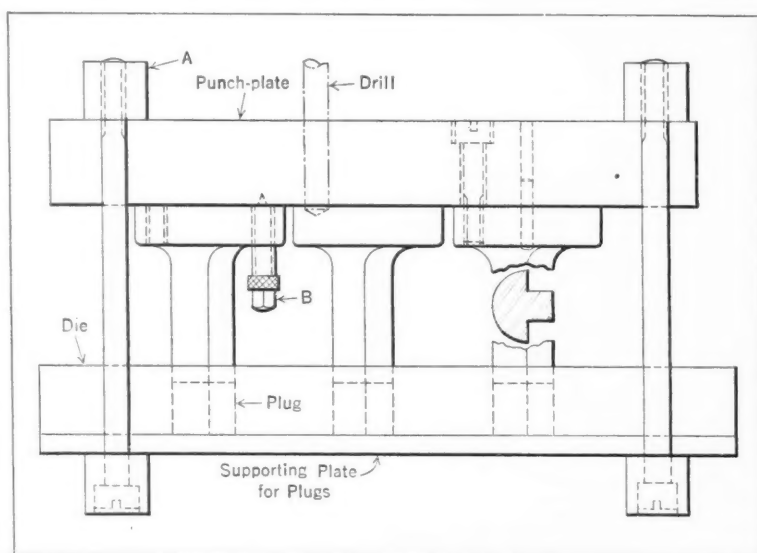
Blanking Die Equipped with "Floating" Punches to Facilitate Accurate Alignment. Screw-punch B Locates the Screw-holes in the Punch-plate
